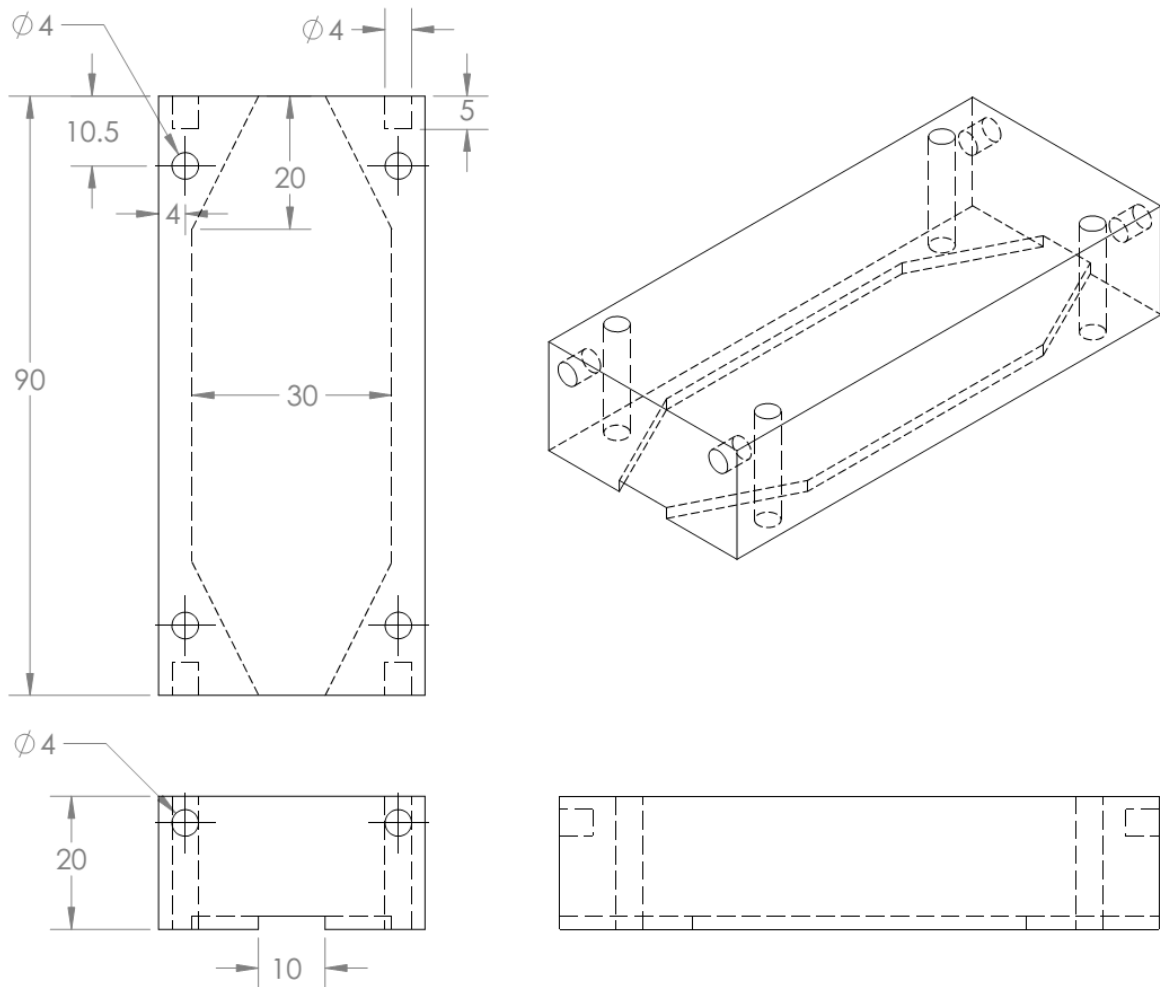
Cold Heat Exchanger Top and Bottom Plates
